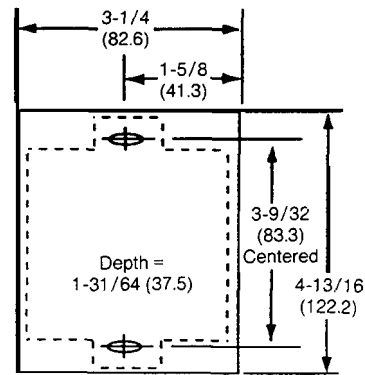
TS-81011 Series Mounting Dimensions American Standard Mounting.
